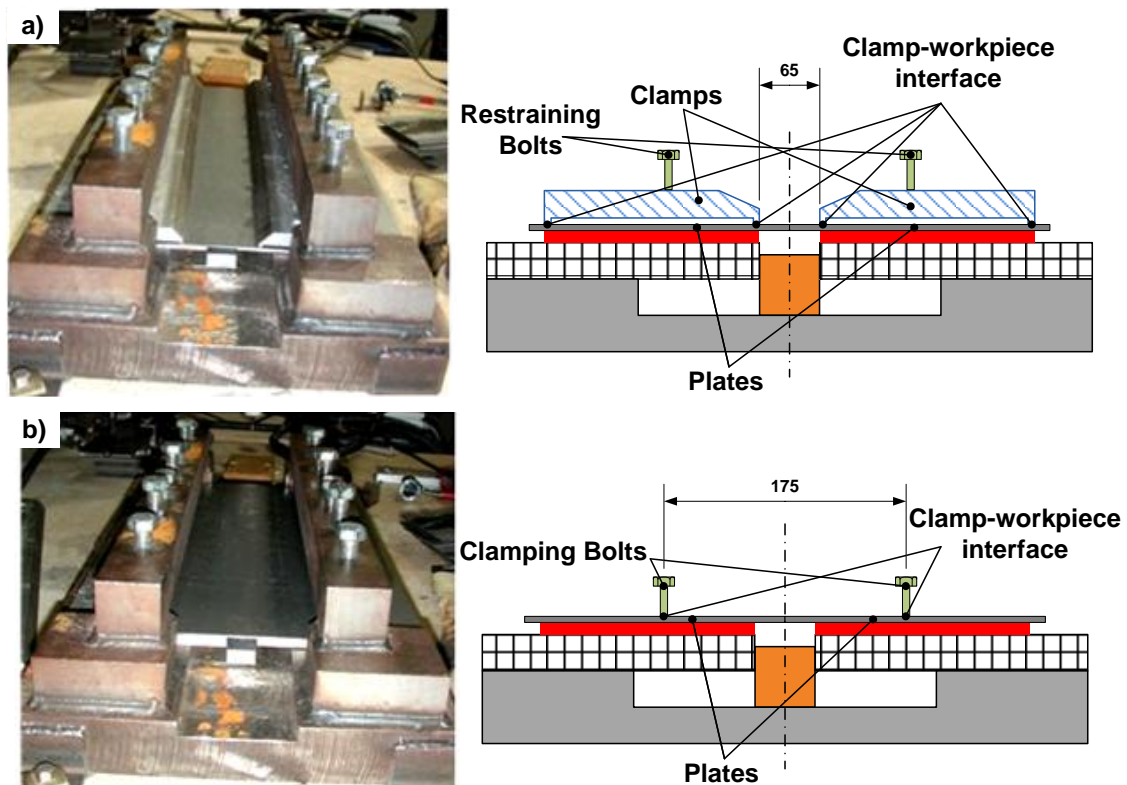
Clamping arrangements investigated with TTC a) clamping applied via Aluminium plates machined to minimise clamp heat sink b) clamping applied via restraining bolts directly
